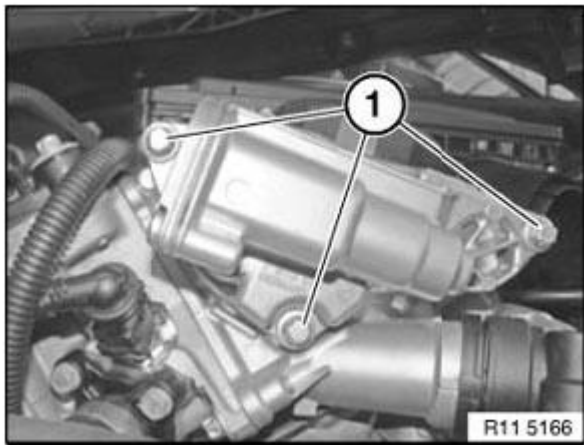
Identifying Bolts On Oil-Coolant Heat Exchanger
